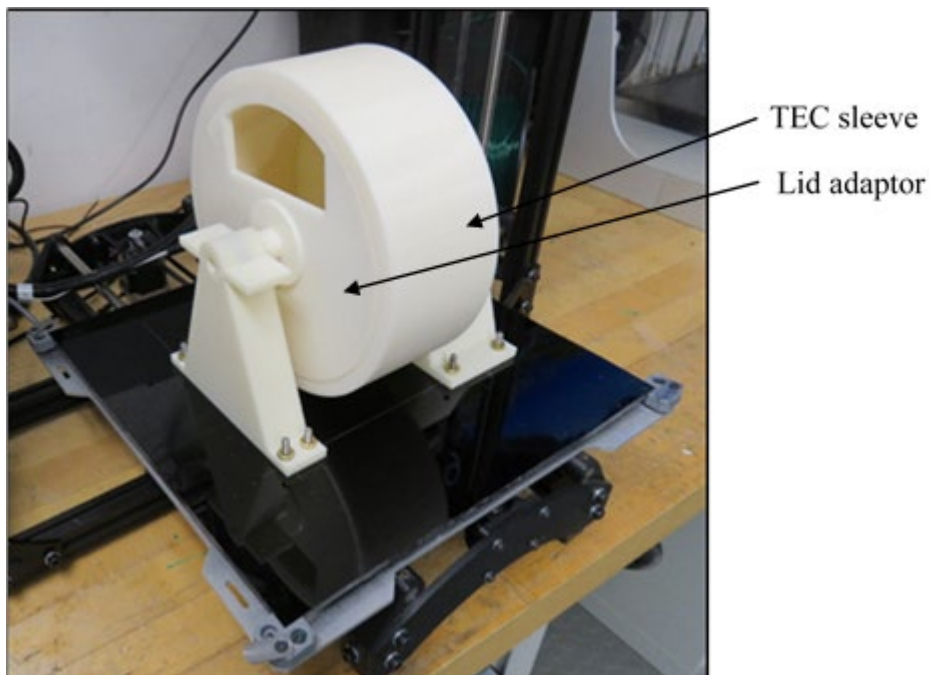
Fully assembled, 2<sup>nd</sup> iteration cylindrical print bed (TEC sleeve).
